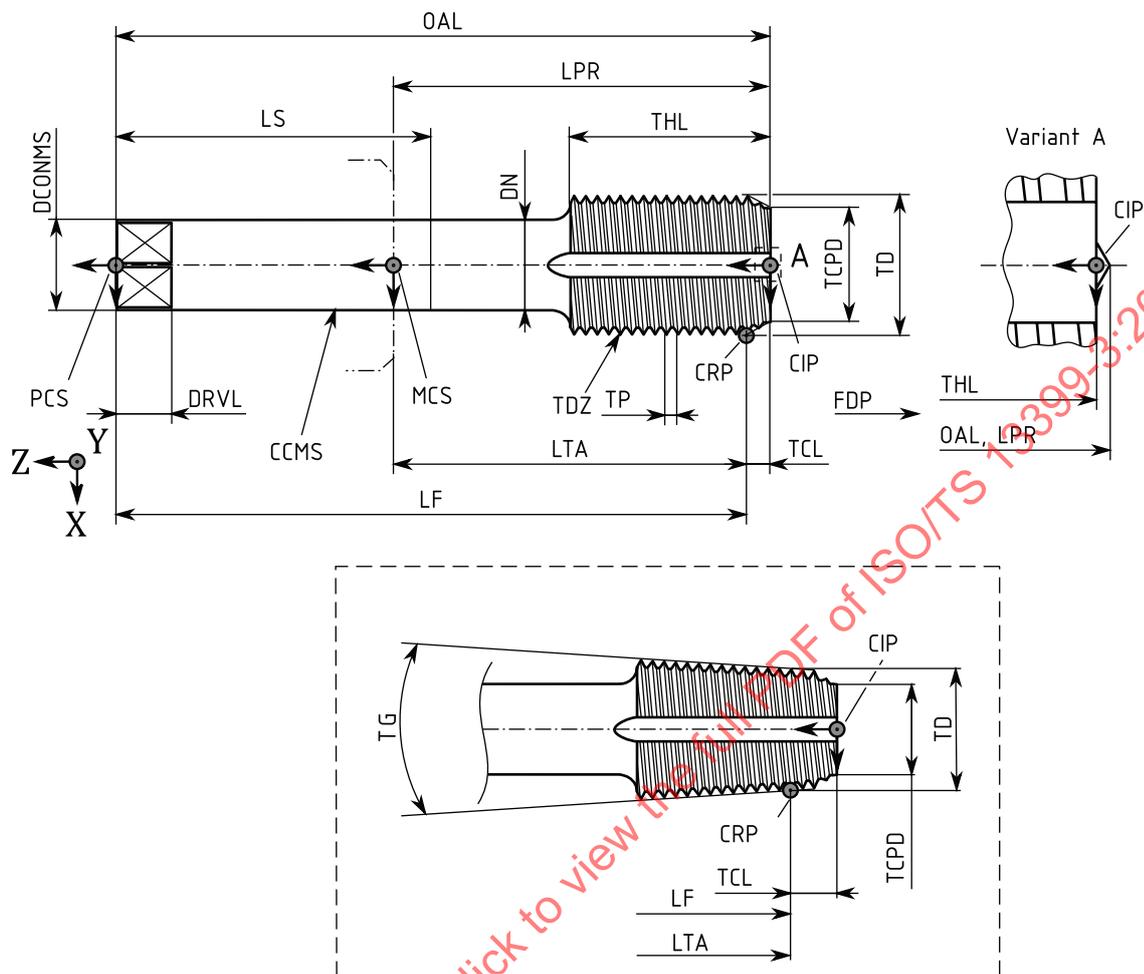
ISYC 301-03 - Thread forming tap with cylindrical shank and drive key
